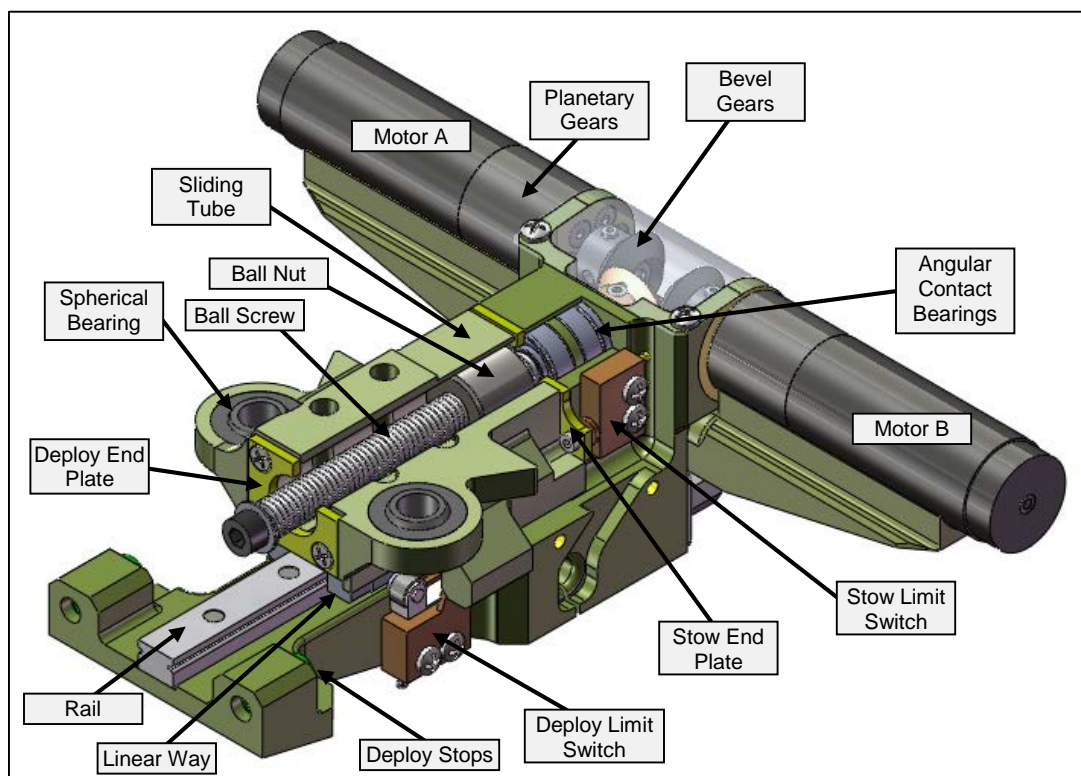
Motor Bracket Assembly shown in the stowed state (with Sliding Tube shown as section for clarity)
